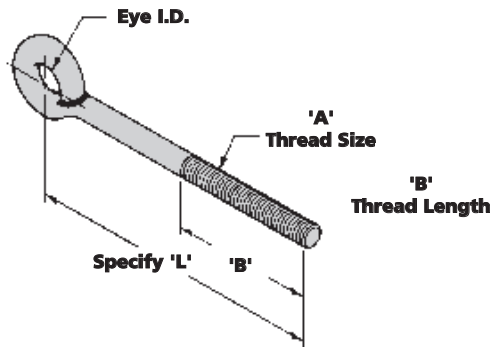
Welded Eye Rod (right-hand threads)
